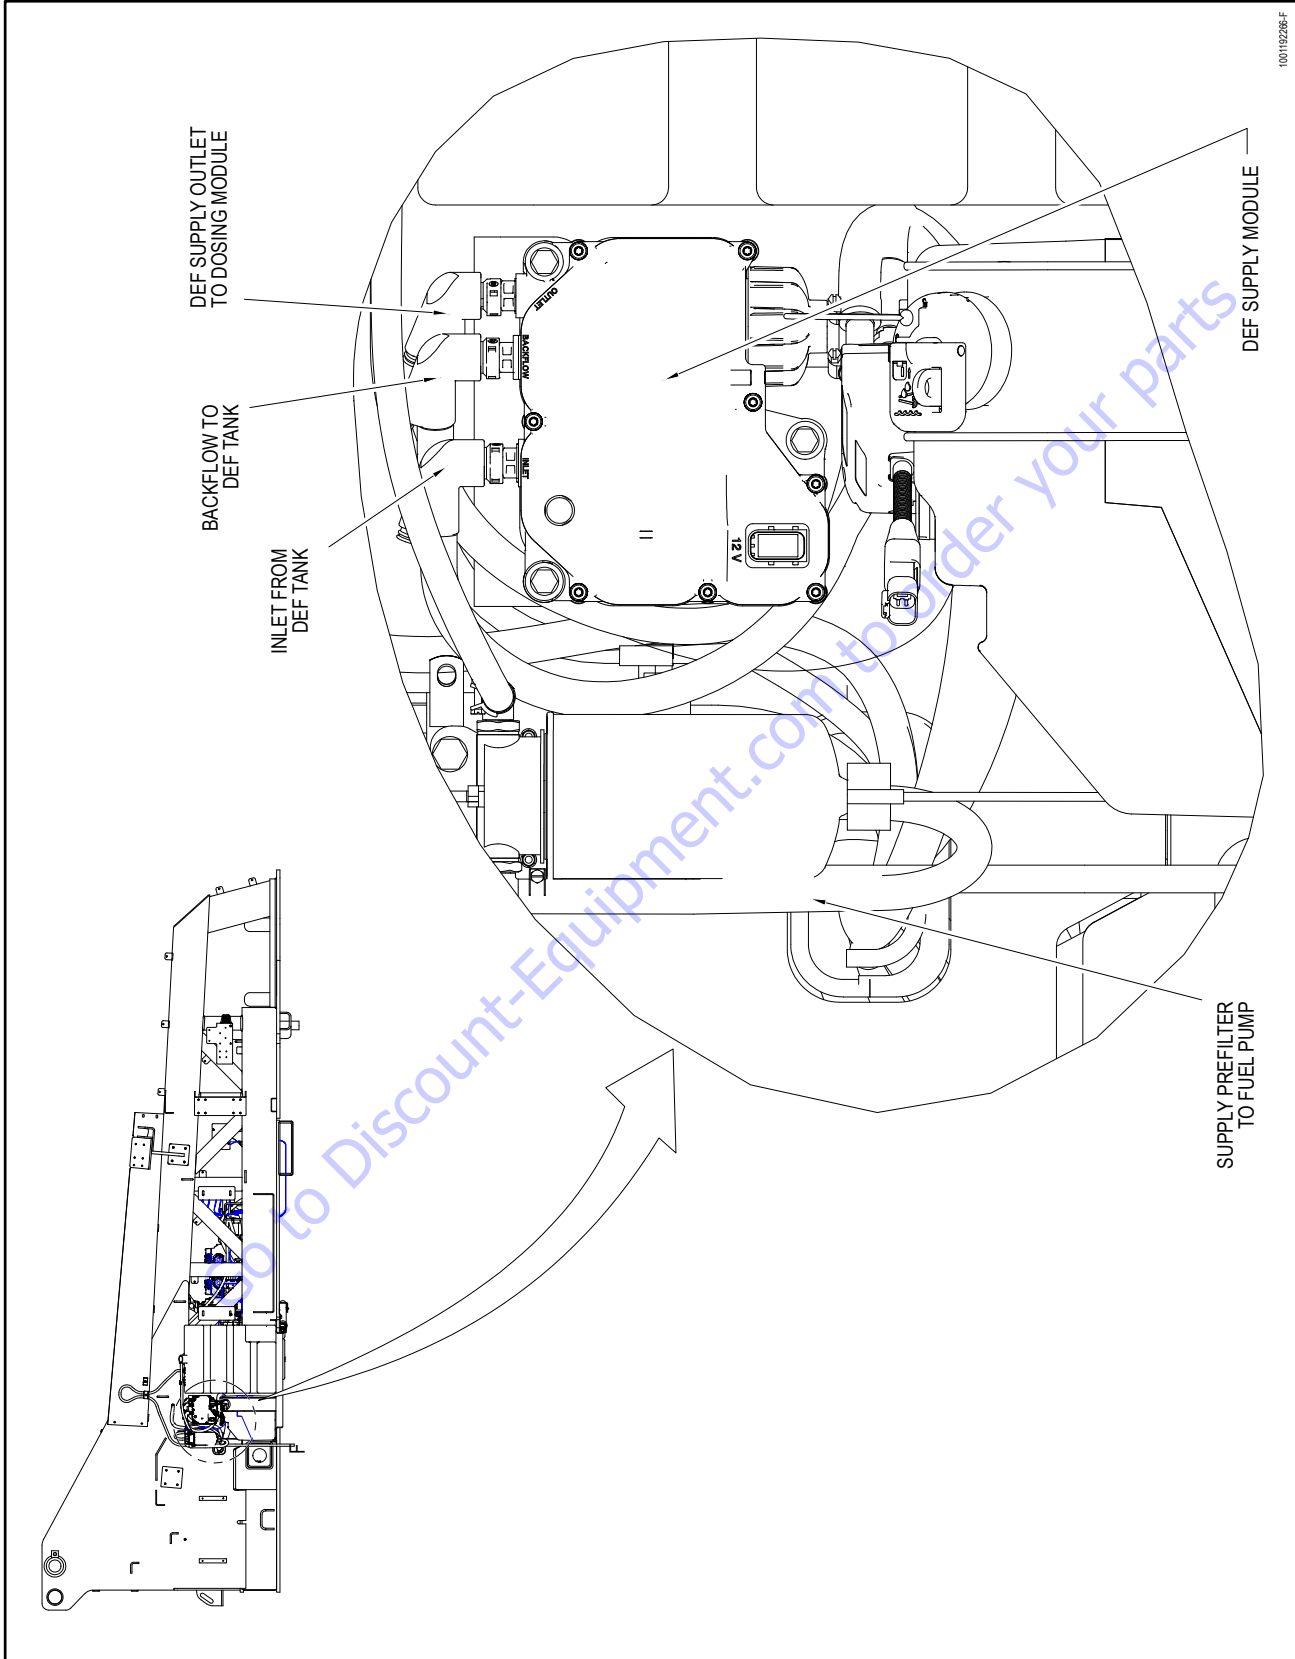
Engine Installation and Diesel Exhaust Fluid (DEF) System - Sheet 3 of 8
